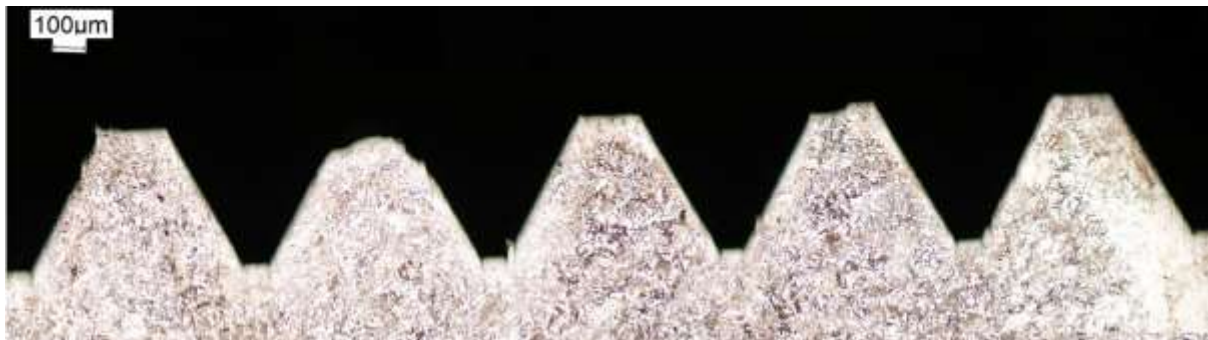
M5, pre-hole diameter 4.3 mm, lower thread profile, objective 10X, 45° printing inclination
